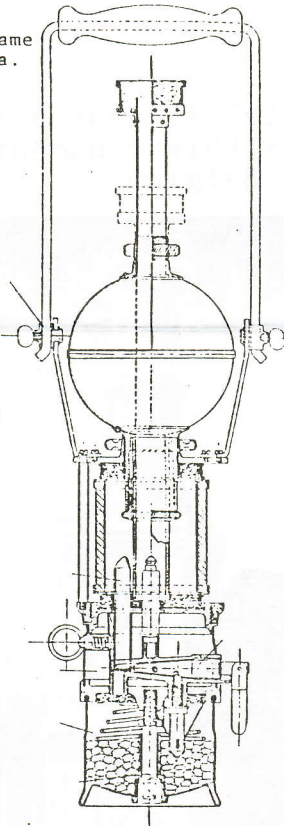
SECTION OF FLEISSNER LAMP BURNING ACETYLENE.
